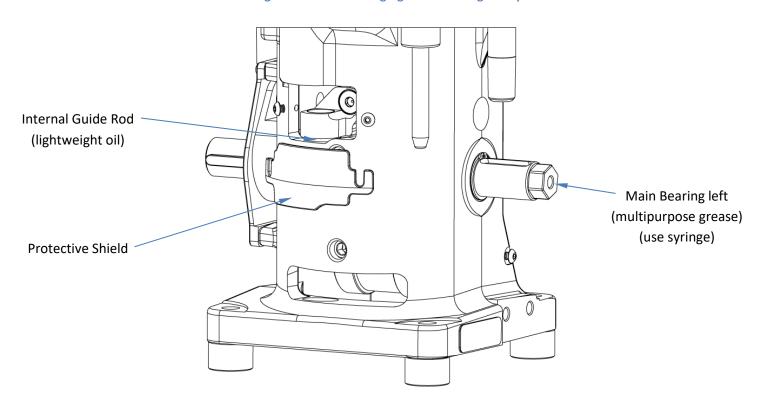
Main Bearing left and Internal Guide Rod lubrication points
